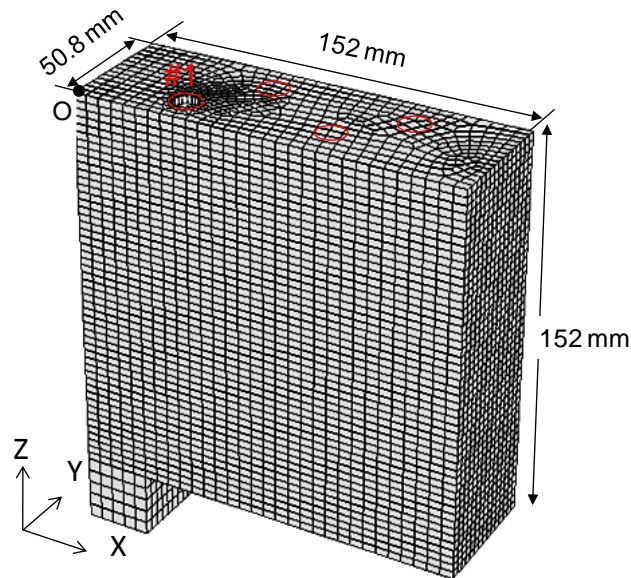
The 3-D FEA mesh of the workpiece for multi-hole drilling
